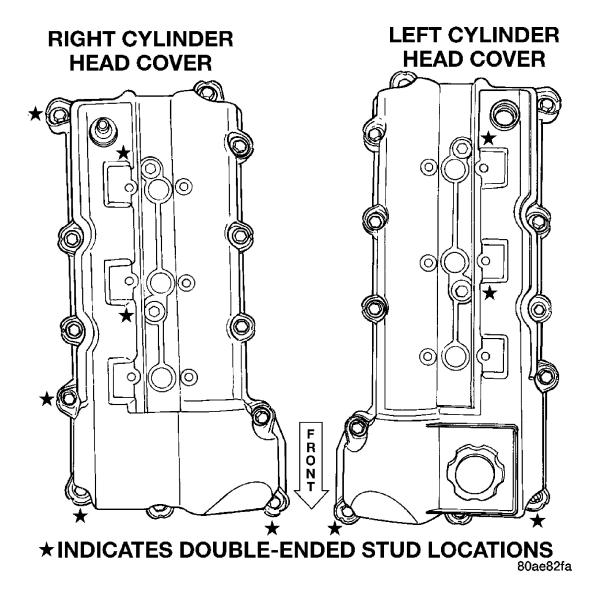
Identifying Cylinder Head Covers Courtesy of CHRYSLER LLC
